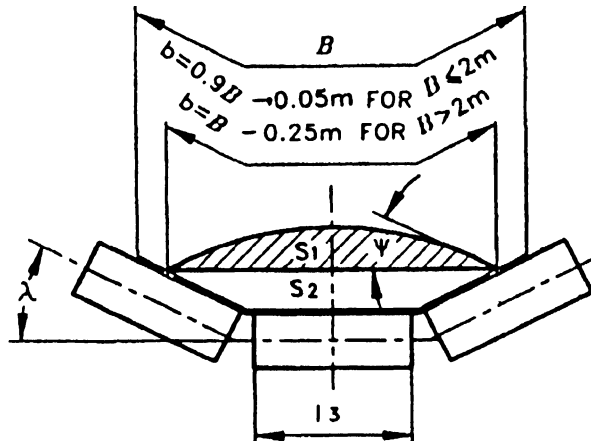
MAXIMUM SECTION B OF HANDLED MATERIAL FOR TRIPLE ROLLER TROUGHED BELT
